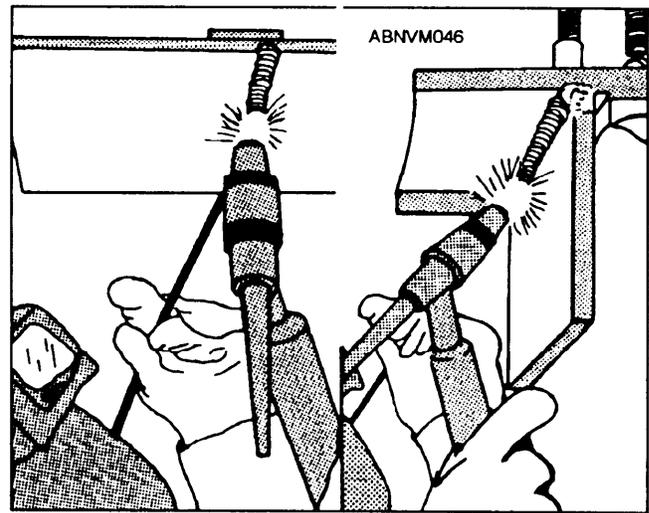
Making overhead multipass groove and fillet welds.
